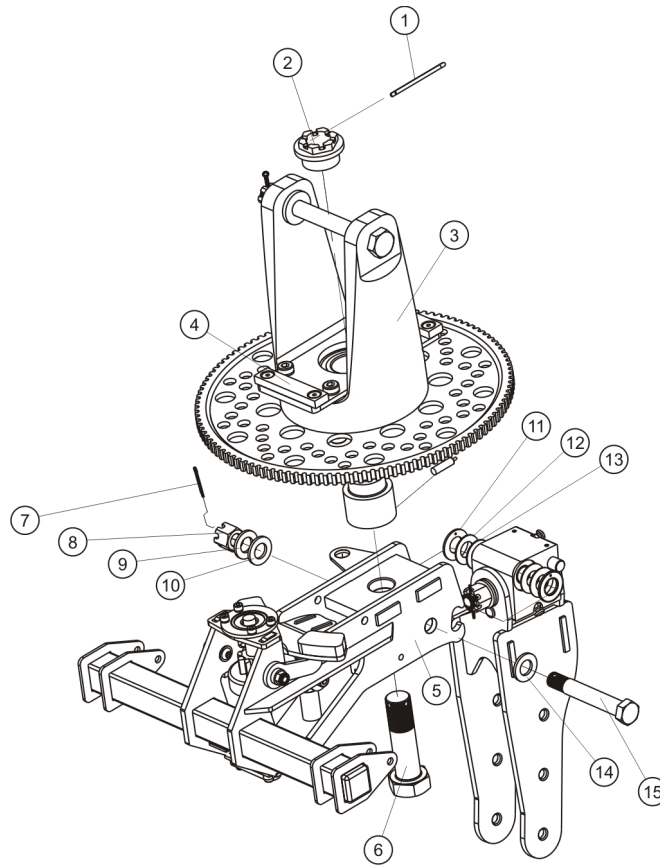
Gimbal head assembly, Rotor System II (with spring washers)
